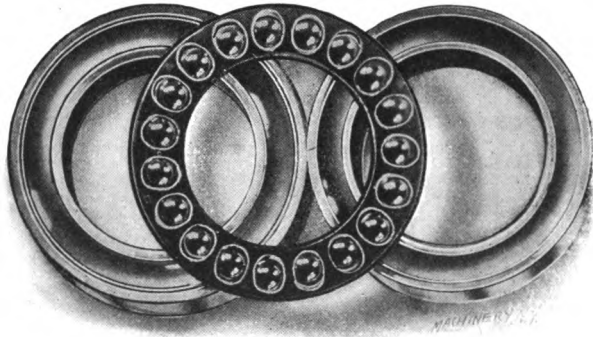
Upper and Lower Races for Thrust Bearing, and Balls with Retainer having Elliptical Holes
